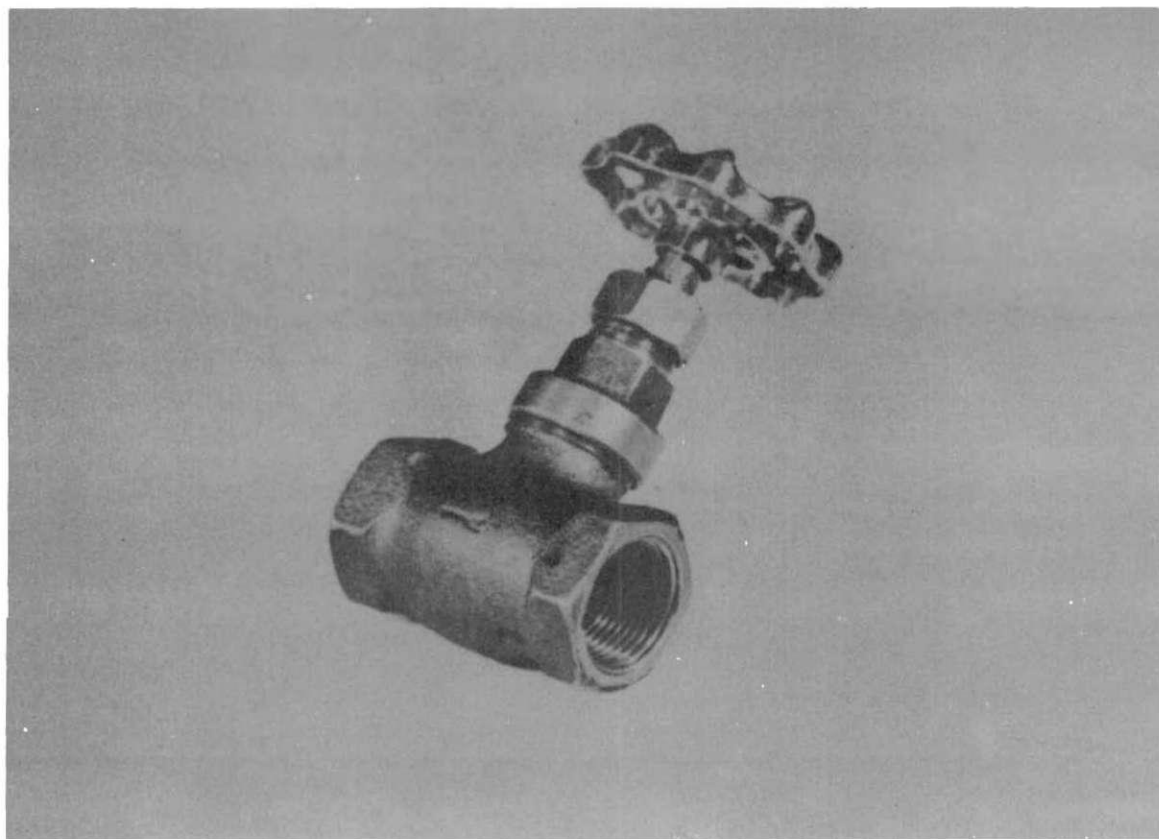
Assembled View of Three-quarter Inch Globe Valve Used in Stage Three Operation.
